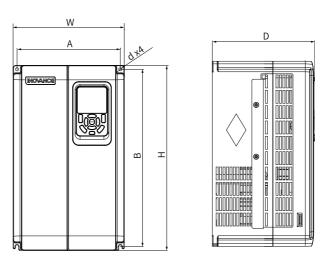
Outline dimensions and mounting dimensions of T5 to T6 models
